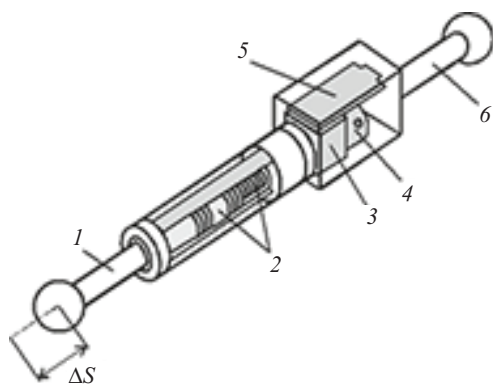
Actuator design: 1 — moving rod; 2 — screw/nut gear; 3 — electric motor; 4 — encoder; 5 — controller; 6 — support rod
